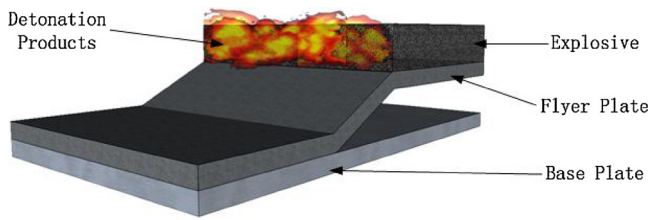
3D schematic diagram of explosive welding.
